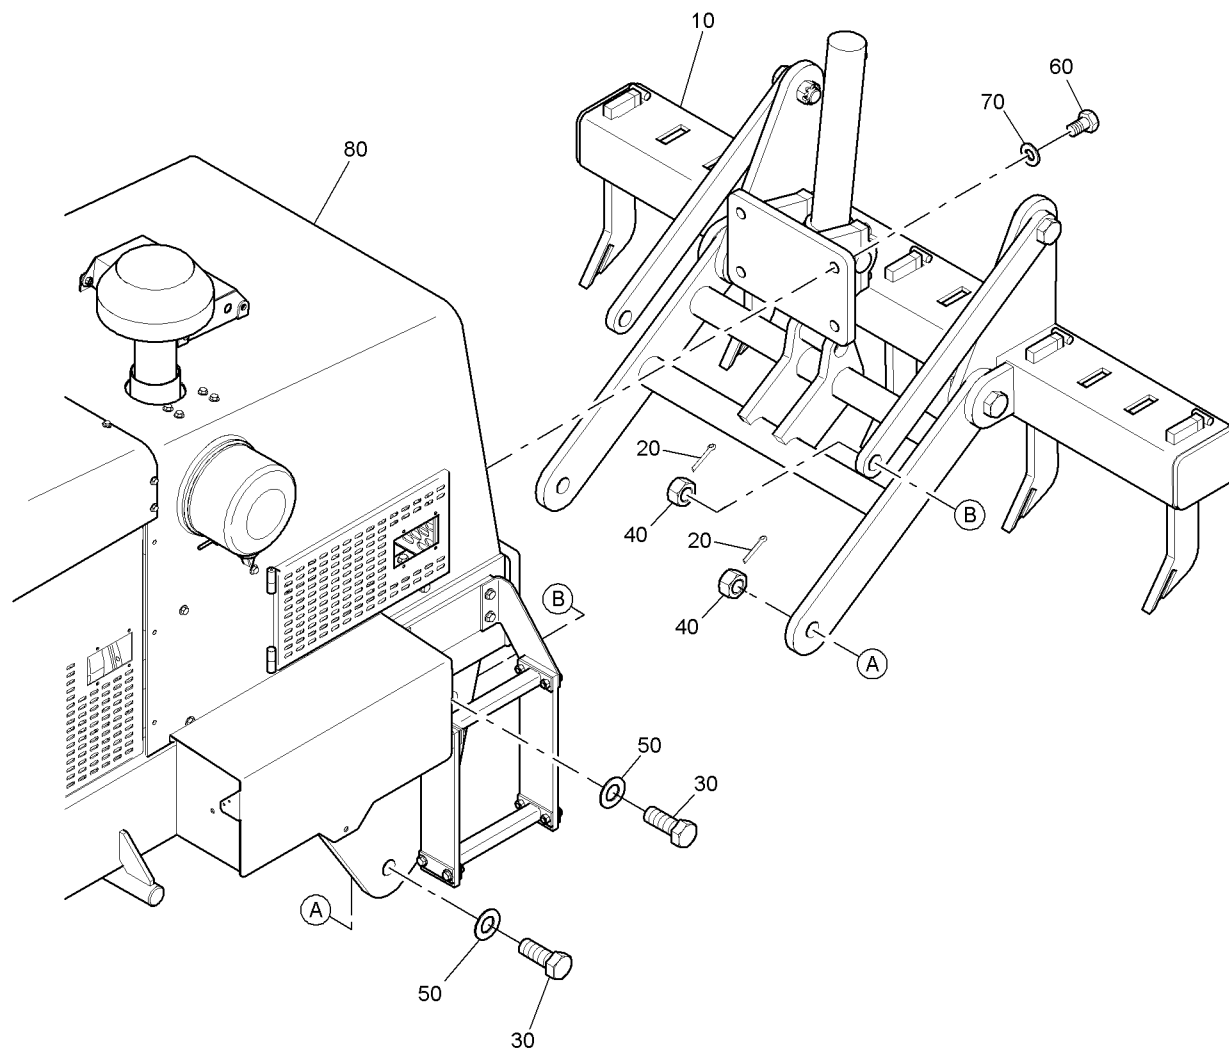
REAR FRAME AND SCARIFIER ASSEMBLY
